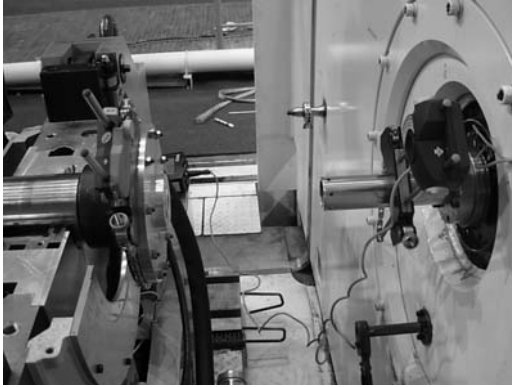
Laser-alignment measurements between the rotor and driving gear shafts
